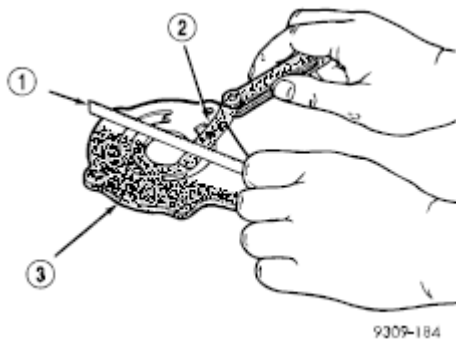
Inserting Feeler Gauge Between Cover Surface And Straight Edge
